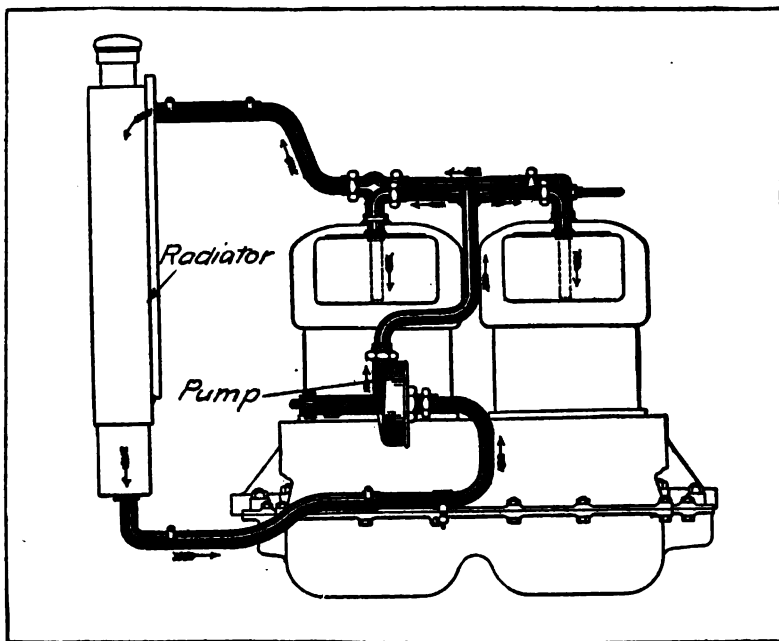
Conventional forced circulation system employing mechanically driven pump to insure movement of water.
